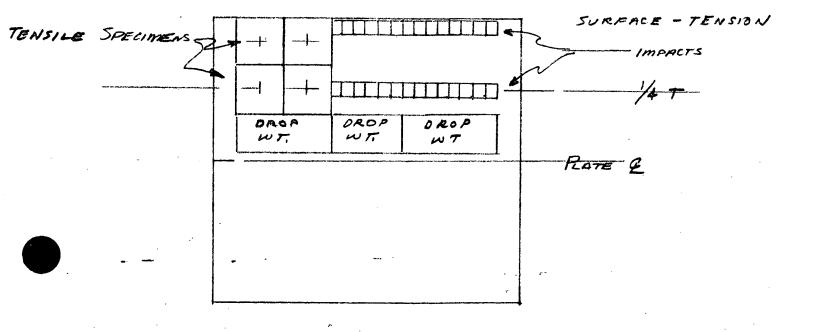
, SKETCH SHOWING LOCATIONS OF SPECIMENS TAKEN FROM SAMPLES D, A AND B.
